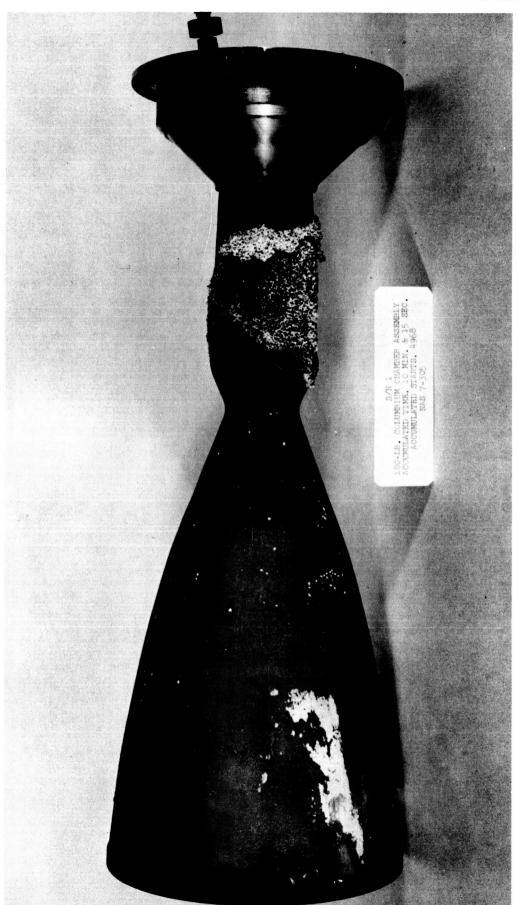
Chamber Assembly From Engine S/N 1 After Test
